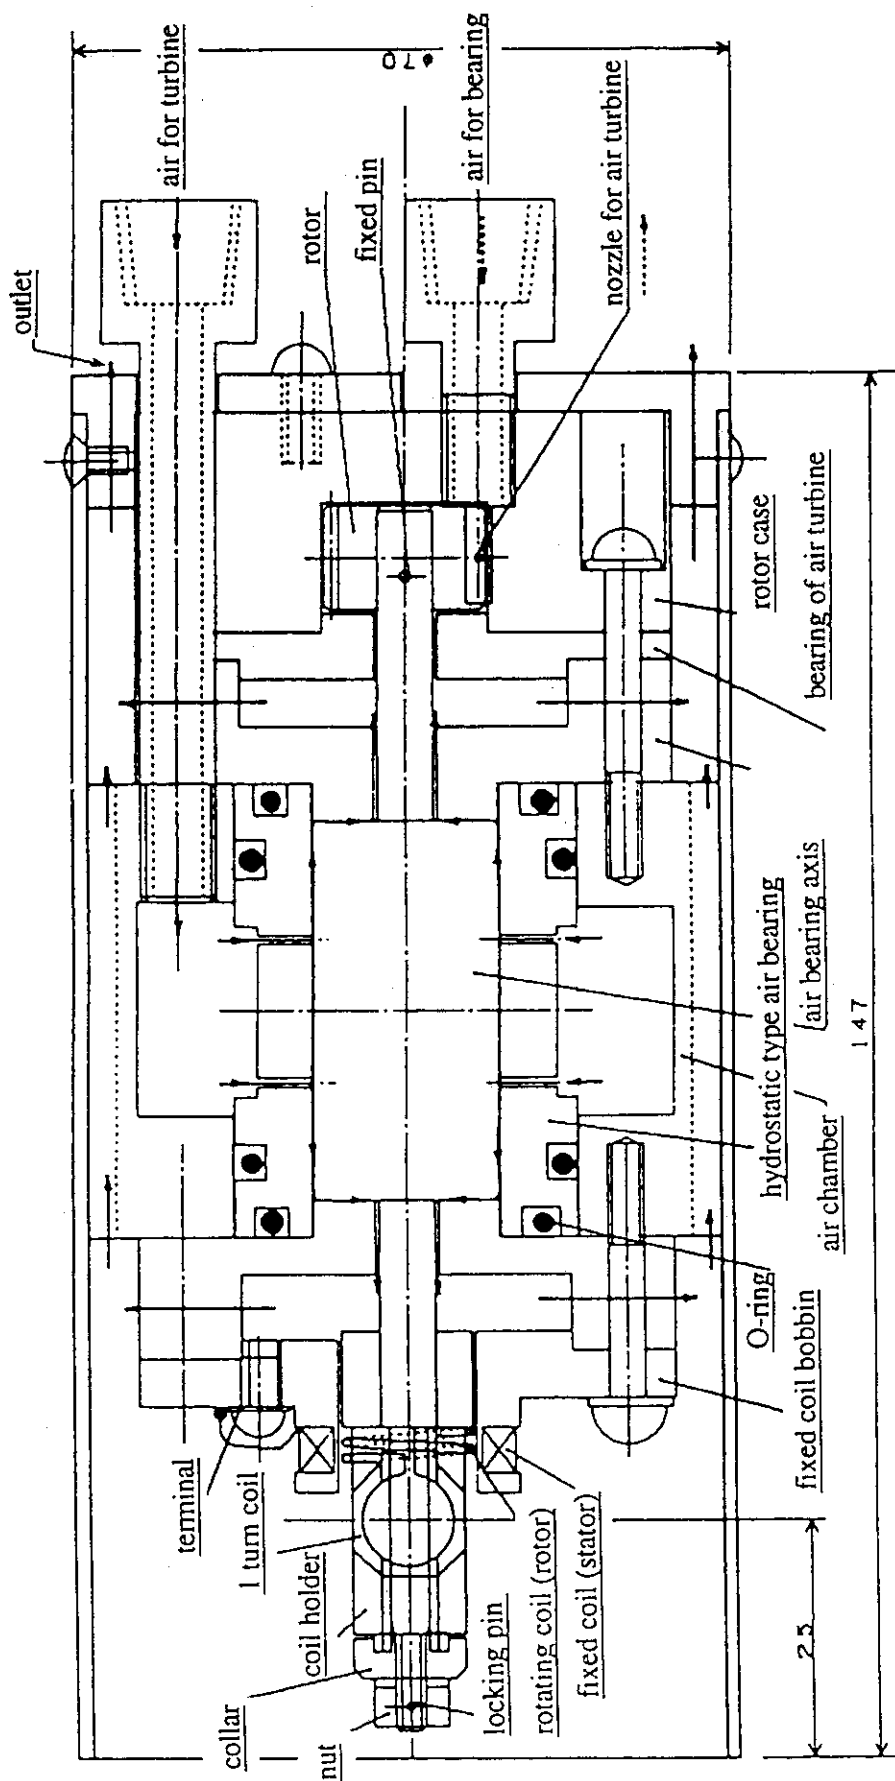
Drawing of transformer-coupled rotating magnetic probe.
